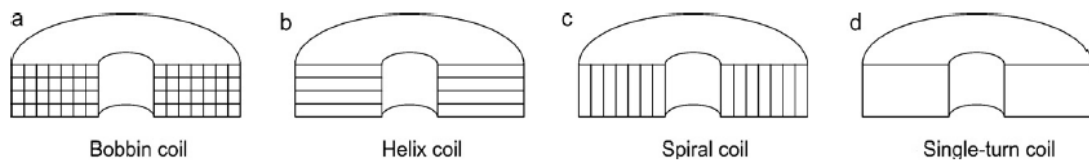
Cylindrical coil types: a) the bobbin; b) the helix; c) the spiral; d) the single-turn coil [73].
